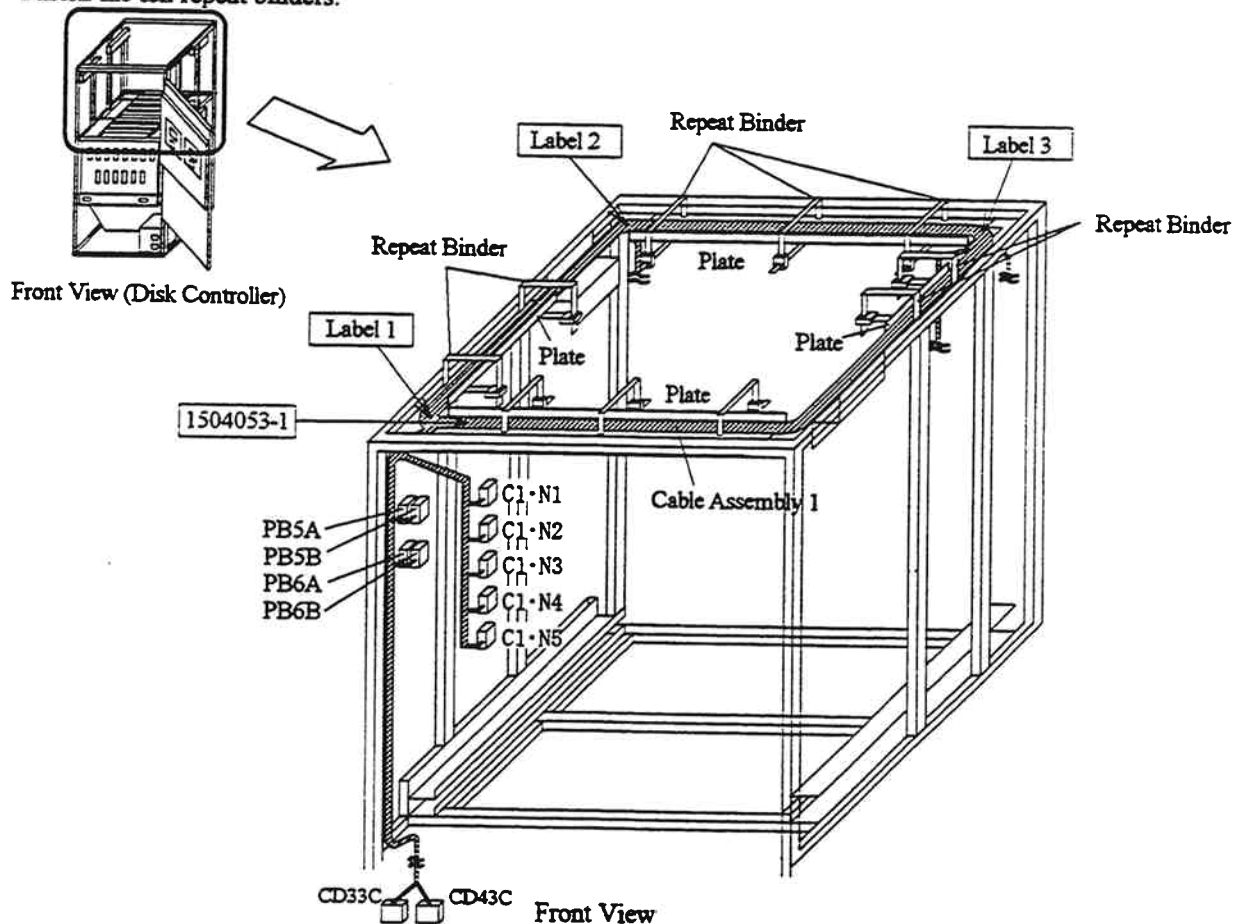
Removal of the Cable Assembly 1
